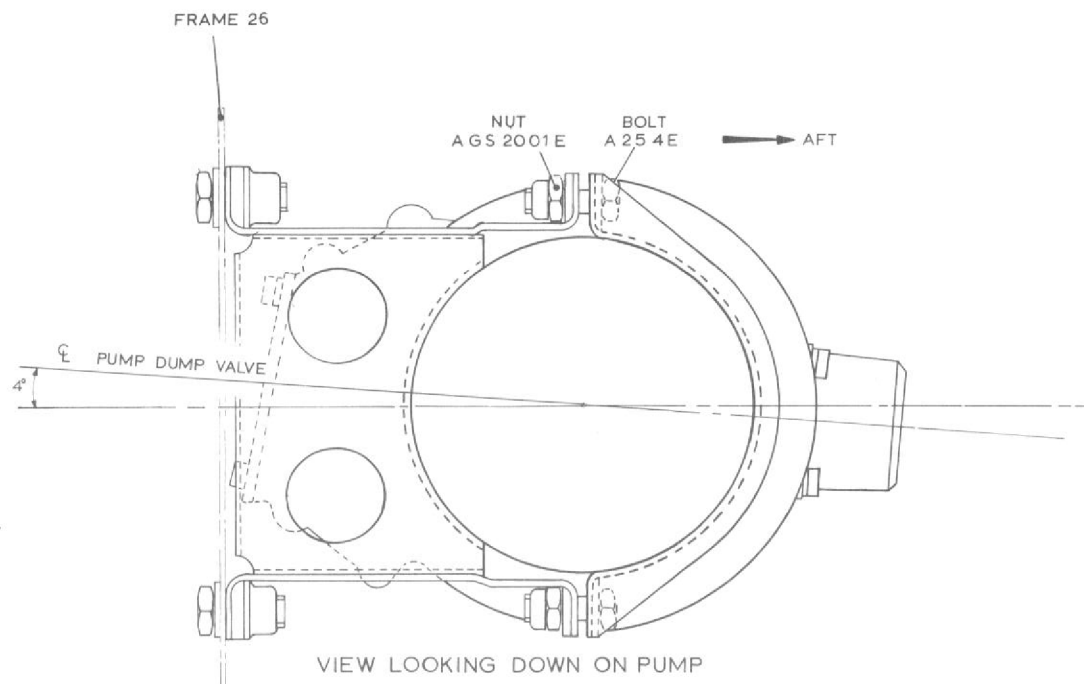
Motor, air blower and fuel pump assembly mounting brackets.
